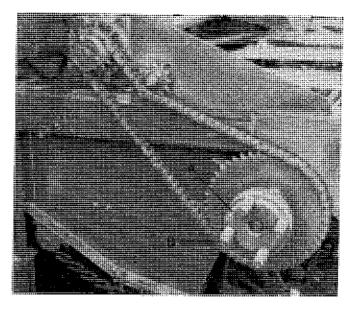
PADDLE SHAFT SLIP CLUTCH (Shield removed for clarity)
